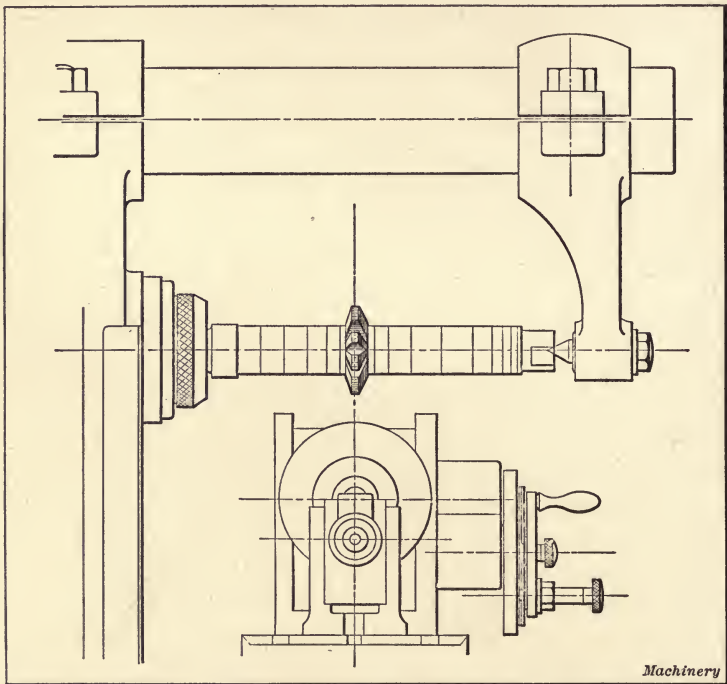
Setting the Milling Machine for Gashing a Worm-wheel Blank
